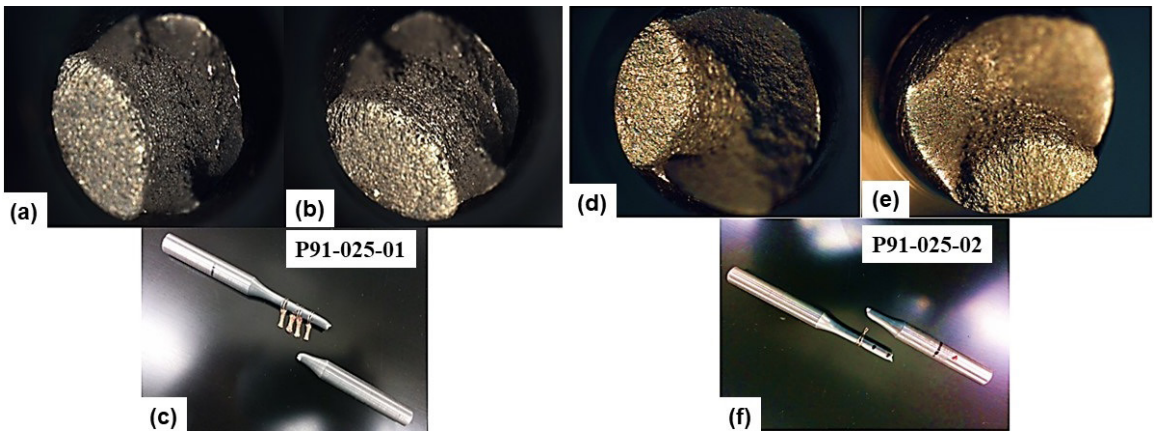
Broken specimen pictures. a) P91-025-01 fractured section taken by microscope; b) other half of the P91-025-01 fractured section; c) point of fracture; d) P91-025-02 fractured section taken by microscope; e) other half of the P91-025-02 fractured section; f) point of fracture.
